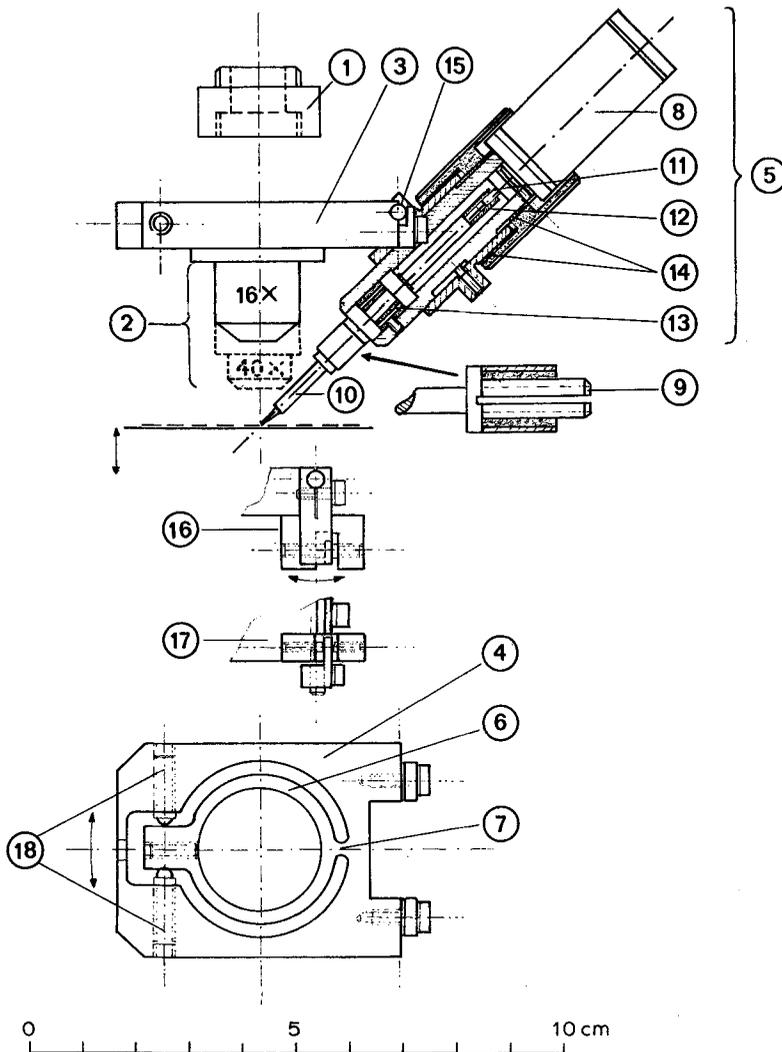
Dimension sketch of the micro-drill. 1, Cylinder; 2, Objective (either $16\times$, or $40\times$); 3, Basal plate (from side); 4, Basal plate (from above); 5, Motor unit; 6, Inner ring; 7, 'Metal bridge', connection between inner ring and basal plate; 8, Electrical motor; 9, Pin-vice (detail); 10, Drill rod with diamond tip in pin-vice; 11, Motor axle; 12, Rubber tube; 13, Ball-bearing; 14, Low-speed screw system; 15, Pivot; 16, Alidade (from side); 17, Alidade (from above); 18, Aligning bolts.
